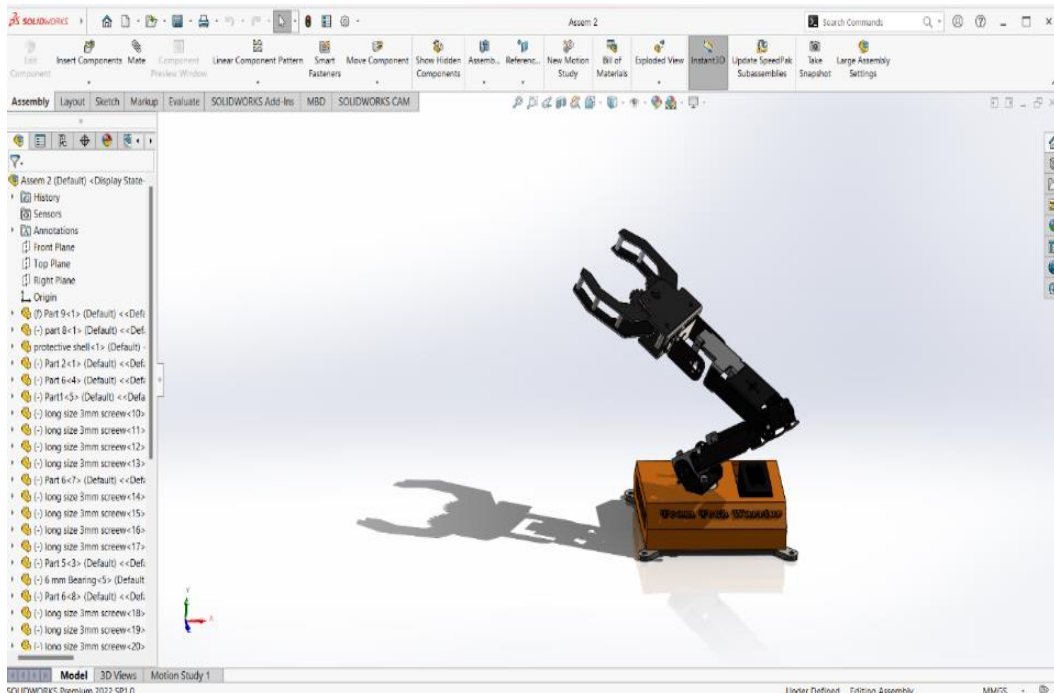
Complete Assembly and Final 3D Design of COBOT in SolidWorks
